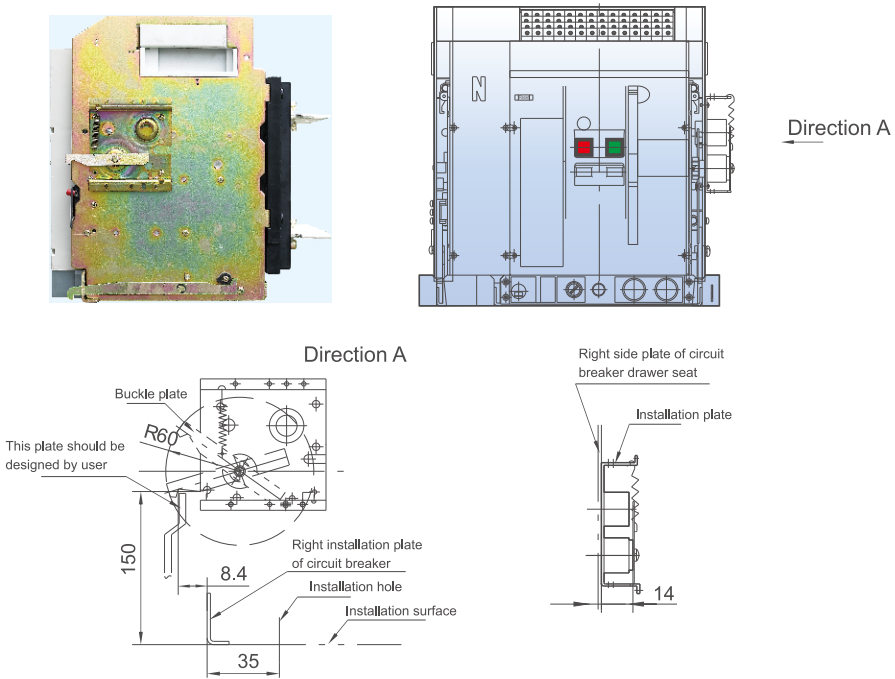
WEW1-1600 withdrawable type circuit breaker status door interlock installation dimensions
